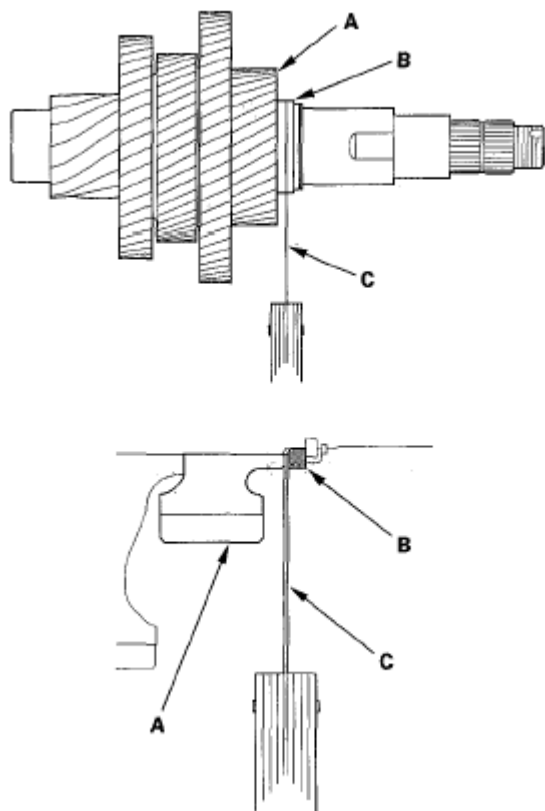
Measuring Clearance Between 4th Gear And Cotters
